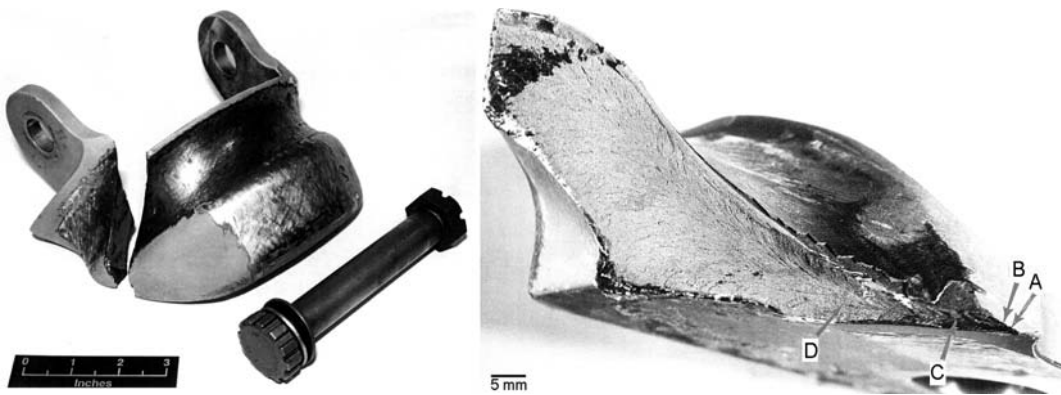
Arresting gear hook-point, manufactured from AISI 4330V, that failed during landing. Failure occurred at the inner fillet radius of the right-hand lug
